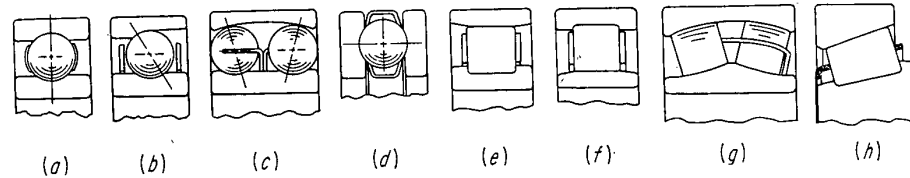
Types of bearings. (a) Radial ball bearing. (b) Angular-contact bearing. (c) Self-aligning ball bearing. (d) Thrust ball bearing. (e) Cylindrical roller bearing (outside race free). (f) Cylindrical roller bearing (inside race free). (g) Spherical roller bearing. (h) Tapered roller bearing.
